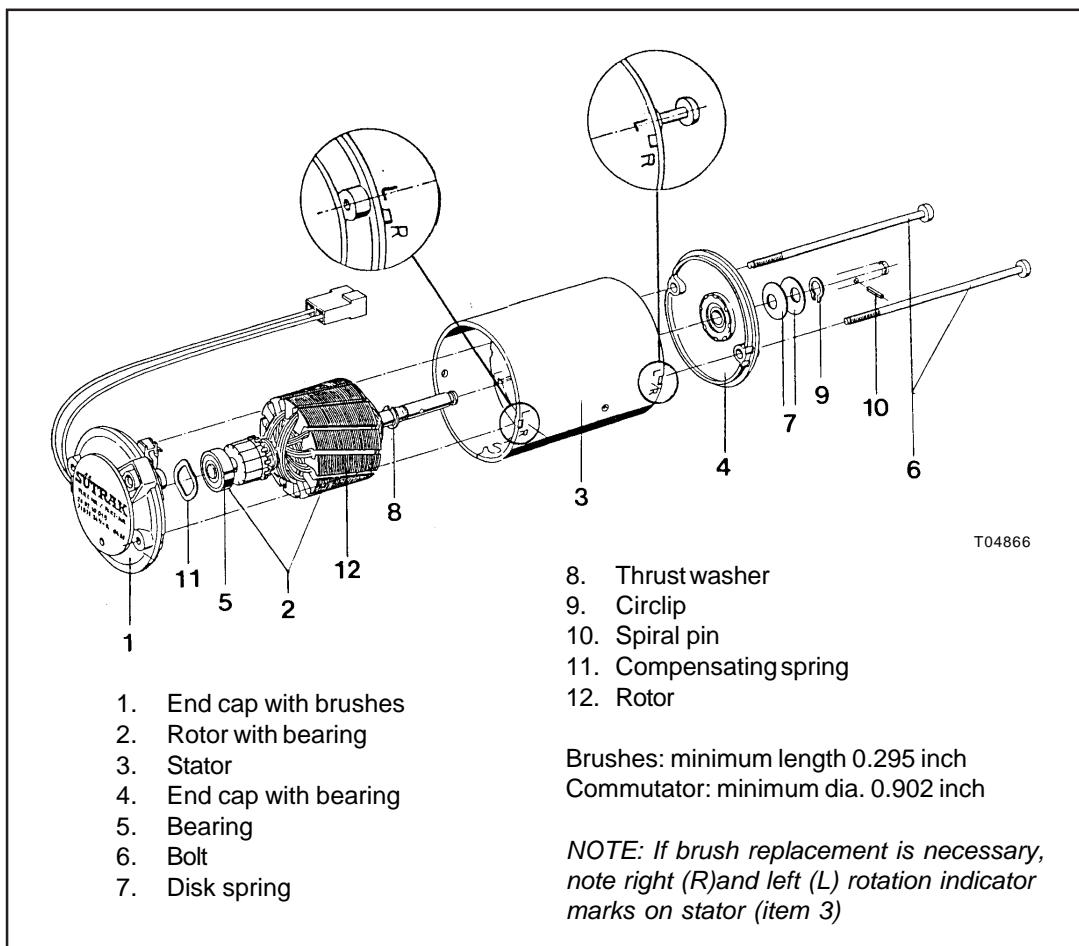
Exploded view of Longlife blower motor (24 VDC-motor, left-handed counterclockwise rotation)
